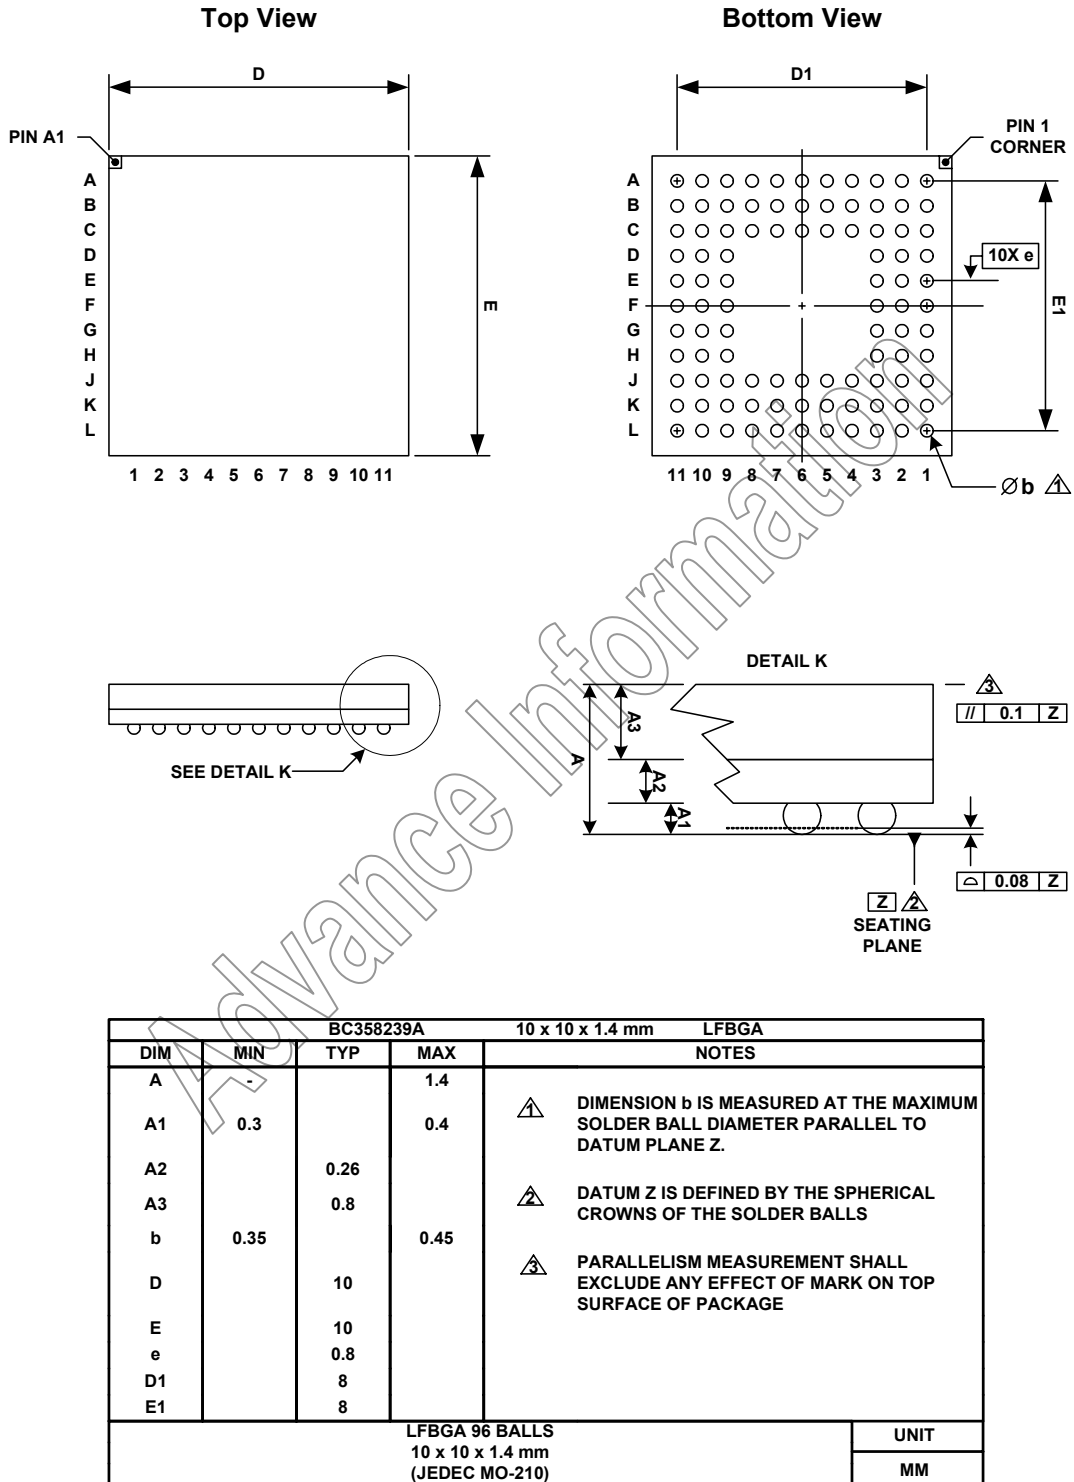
BlueCore3-Multimedia 96-Ball LFBGA Package Dimensions
